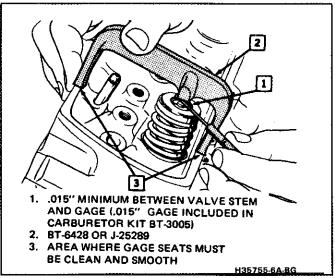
Measuring Valve Stem Height (Bridge-type Tool)
